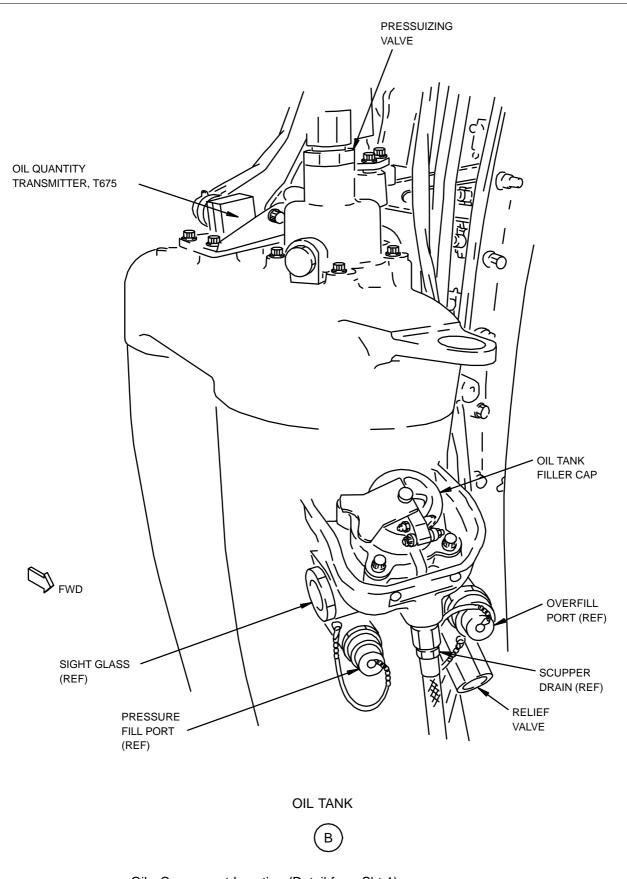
79-00 Oil Component Location Fig. 102 (Sheet 1)
